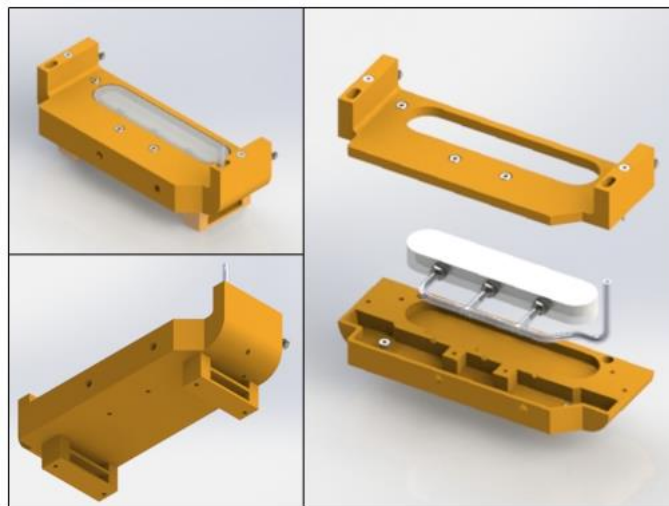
Palm Module: Isometric view (top left) Bottom view (bottom left) Exploded view (right)
